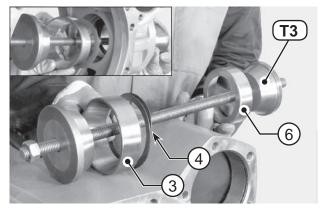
Using special tool T3 (See drawing T3 p. 91) partially insert the thrust block of the bearings (3, 6) and shims (4).
